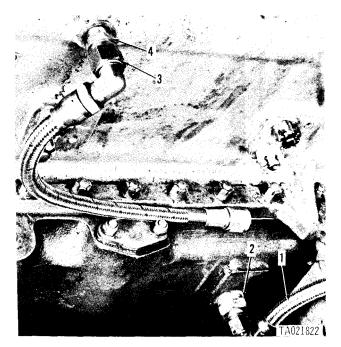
Location of preformed packing at oil transfer tubes in crankcase assembly - rear fan and accessory drive housing mounting base.
